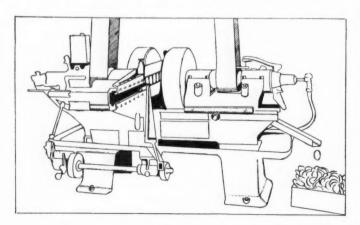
Grinding piston rings on both sides in Besley disk grinder
